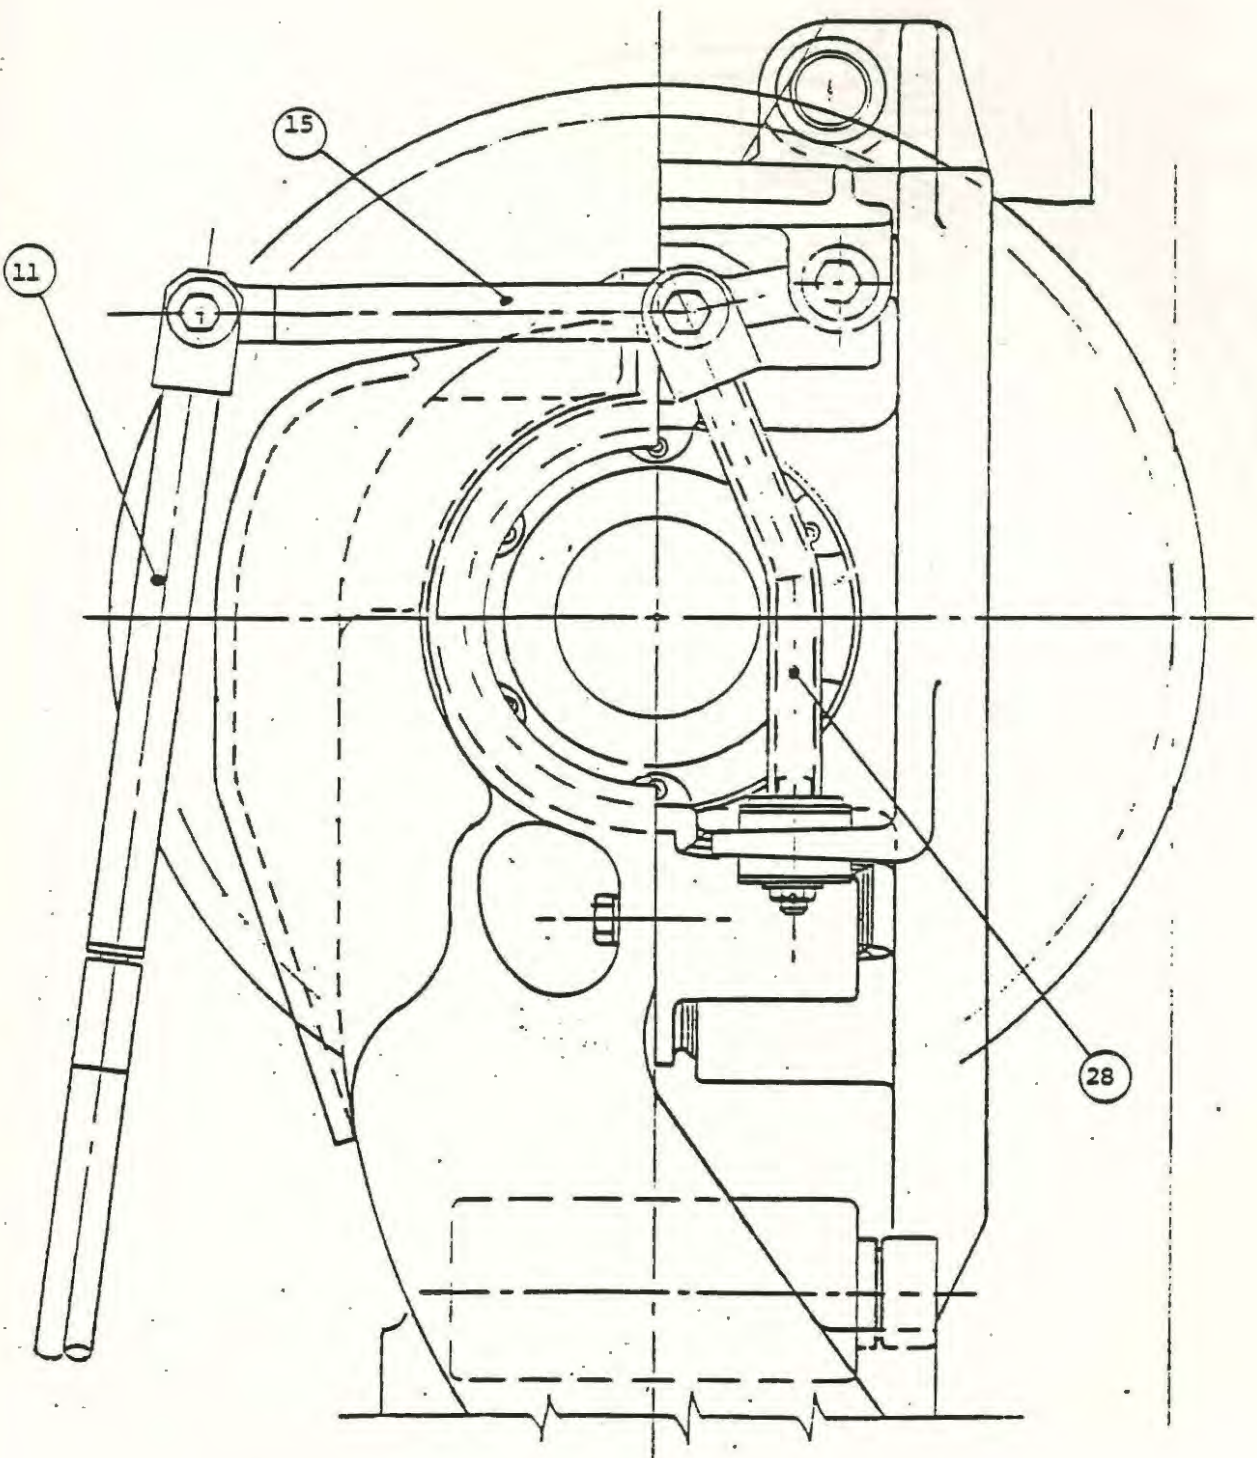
STEERING - FRONT TRUCK INBOARD
